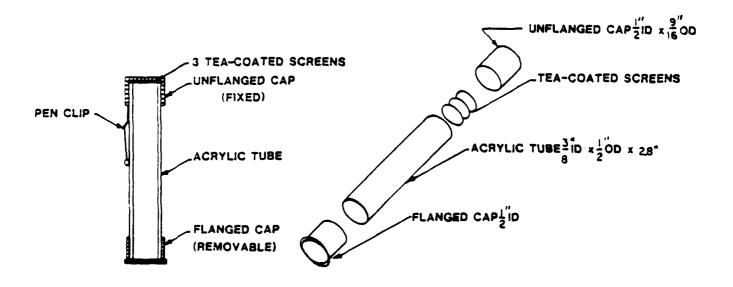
Assembled view (left) and exploded view (right) of sampler.
